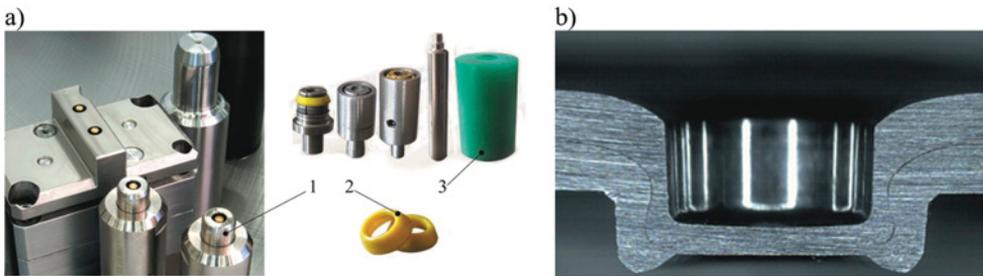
Example joint-forming tools (a) and the cross-section of a joint formed with the use of a round solid die (b): 1 – punch in a blank-holding sleeve with a spring; 2 – elastomer ring of the die with movable segments; 3 – blank-holding elastomer sleeve
